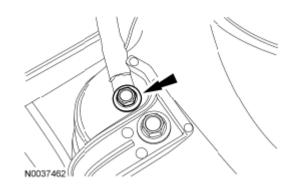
Locating Ground Wire And Bolt Courtesy of FORD MOTOR CO.
